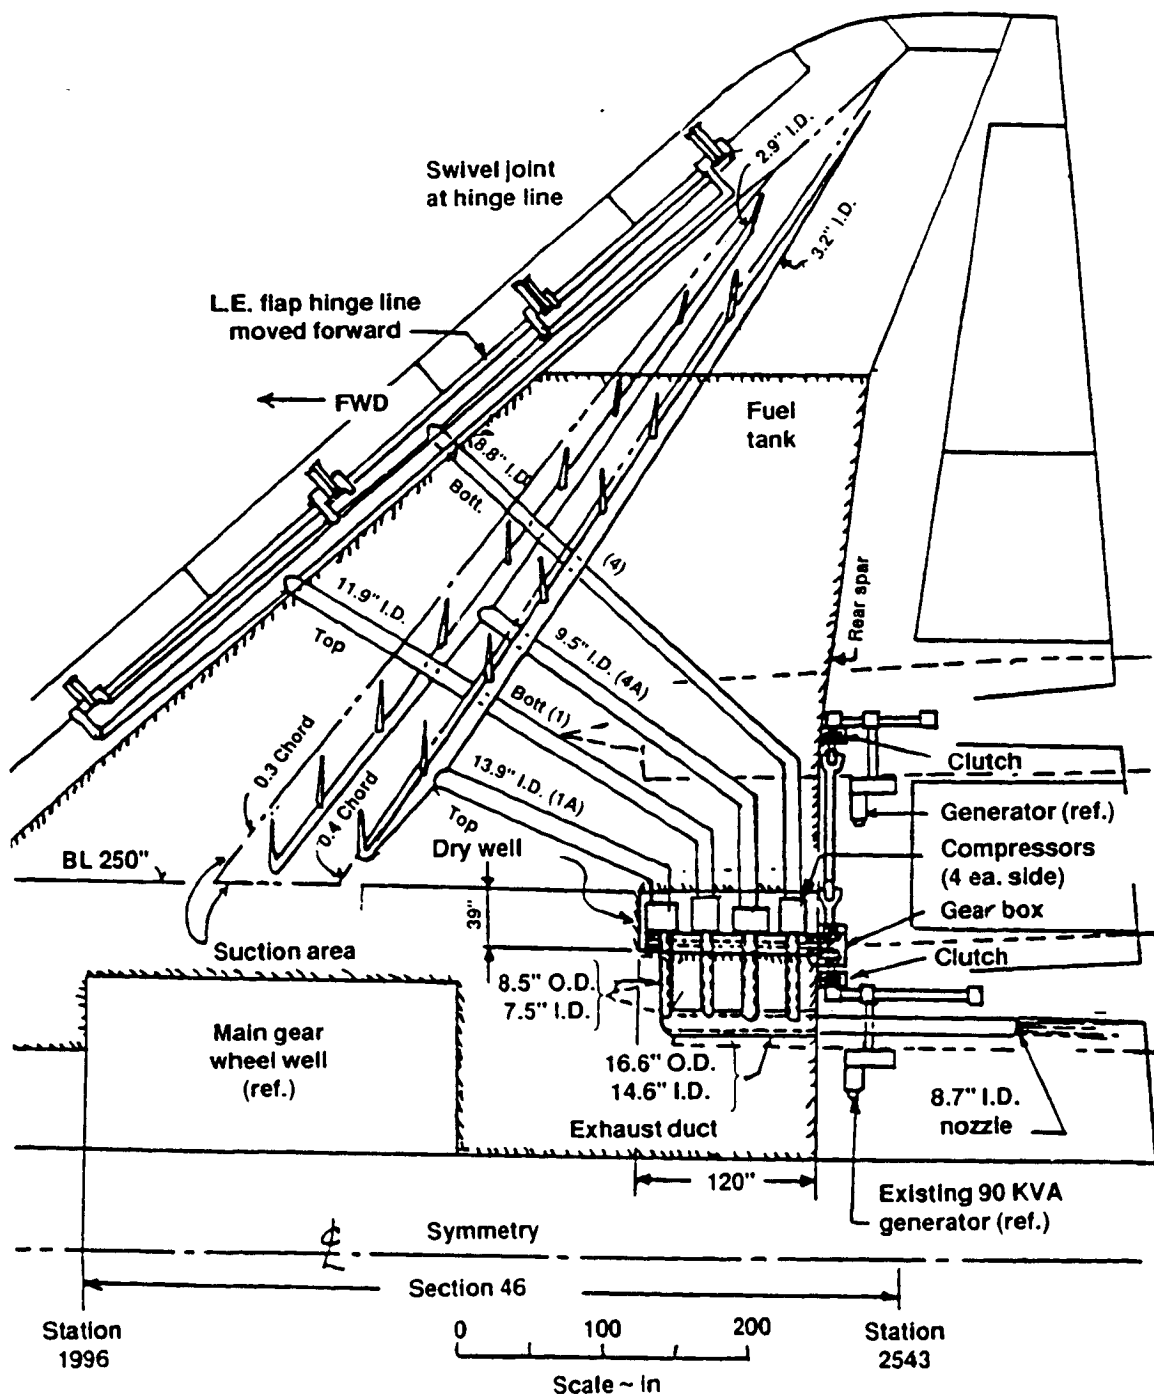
Outboard Wing HLFC (Scheme 1) Mechanical Compressor Drive
